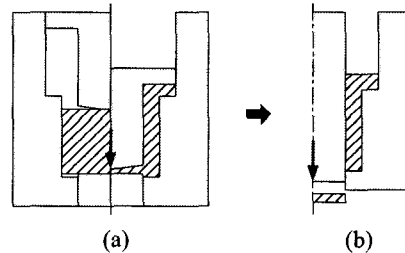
Forming process of a hollow T-shaped part using a solid initial billet (method-1), (a) backward extruding process and (b) piercing process
